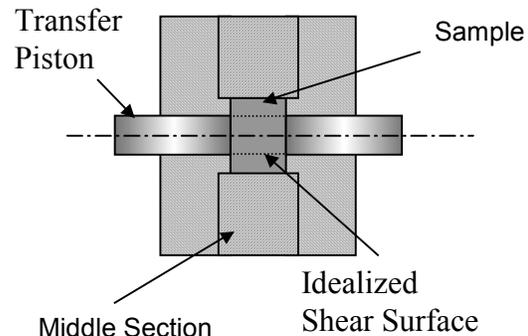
SAMPLE HOLDER ASSEMBLY
